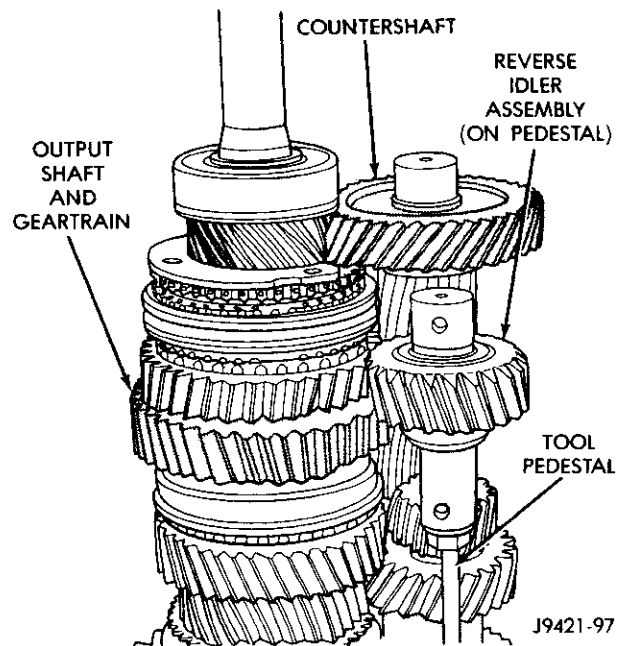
Reverse Idler Assembly Positioned On Assembly Fixture Pedestal
